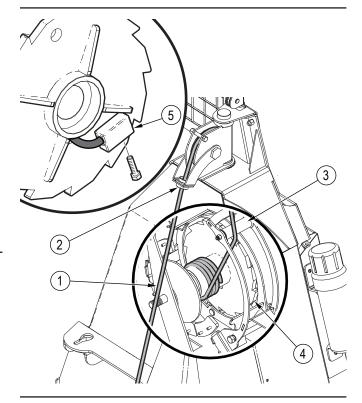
Installing the Synthetic Winch Rope or Steel Winch Cable
